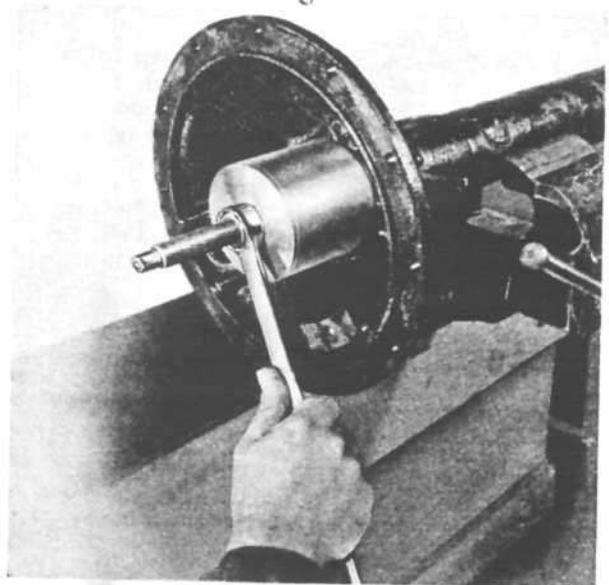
DIFFERENTIAL BEARING CUP PULLER
